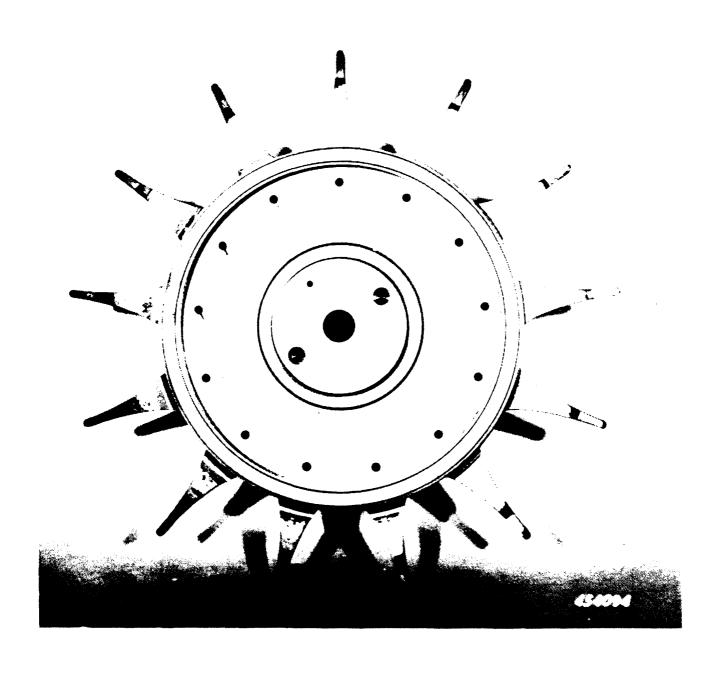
FINAL MACHINED AIR-COOLED TURBINE ROTOR
